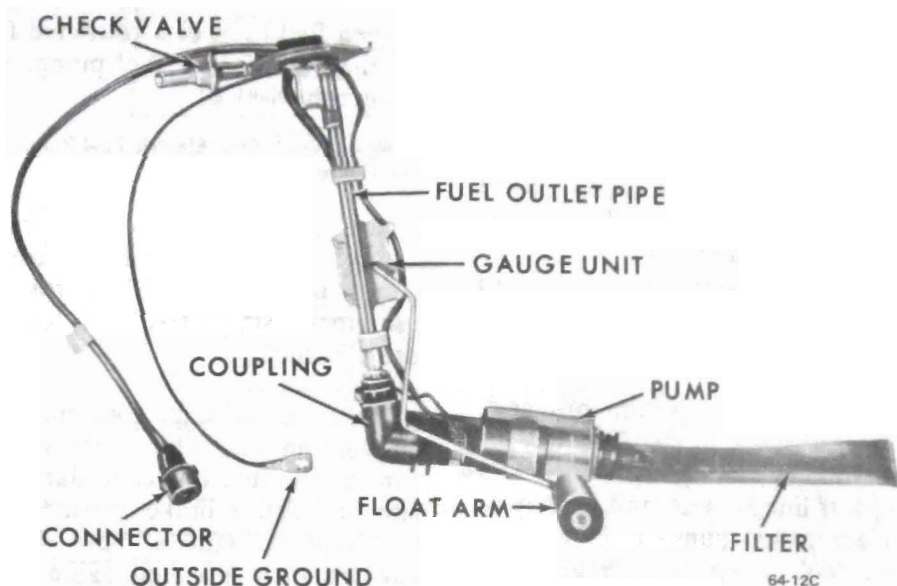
Electric Fuel Pump and Fuel Gauge Tank Unit Assembly
